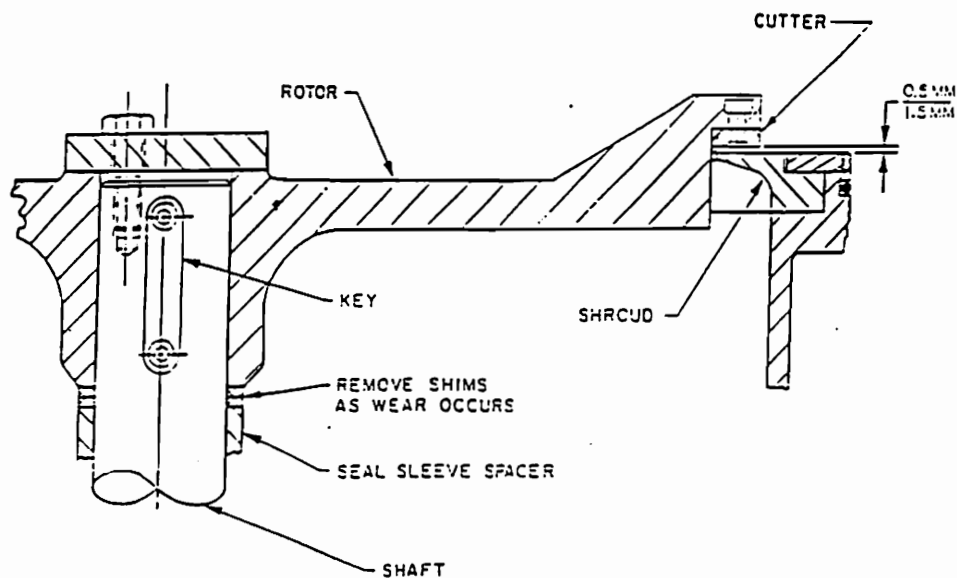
Rotor Cutter/Rotor Shroud Clearance Adjustment
